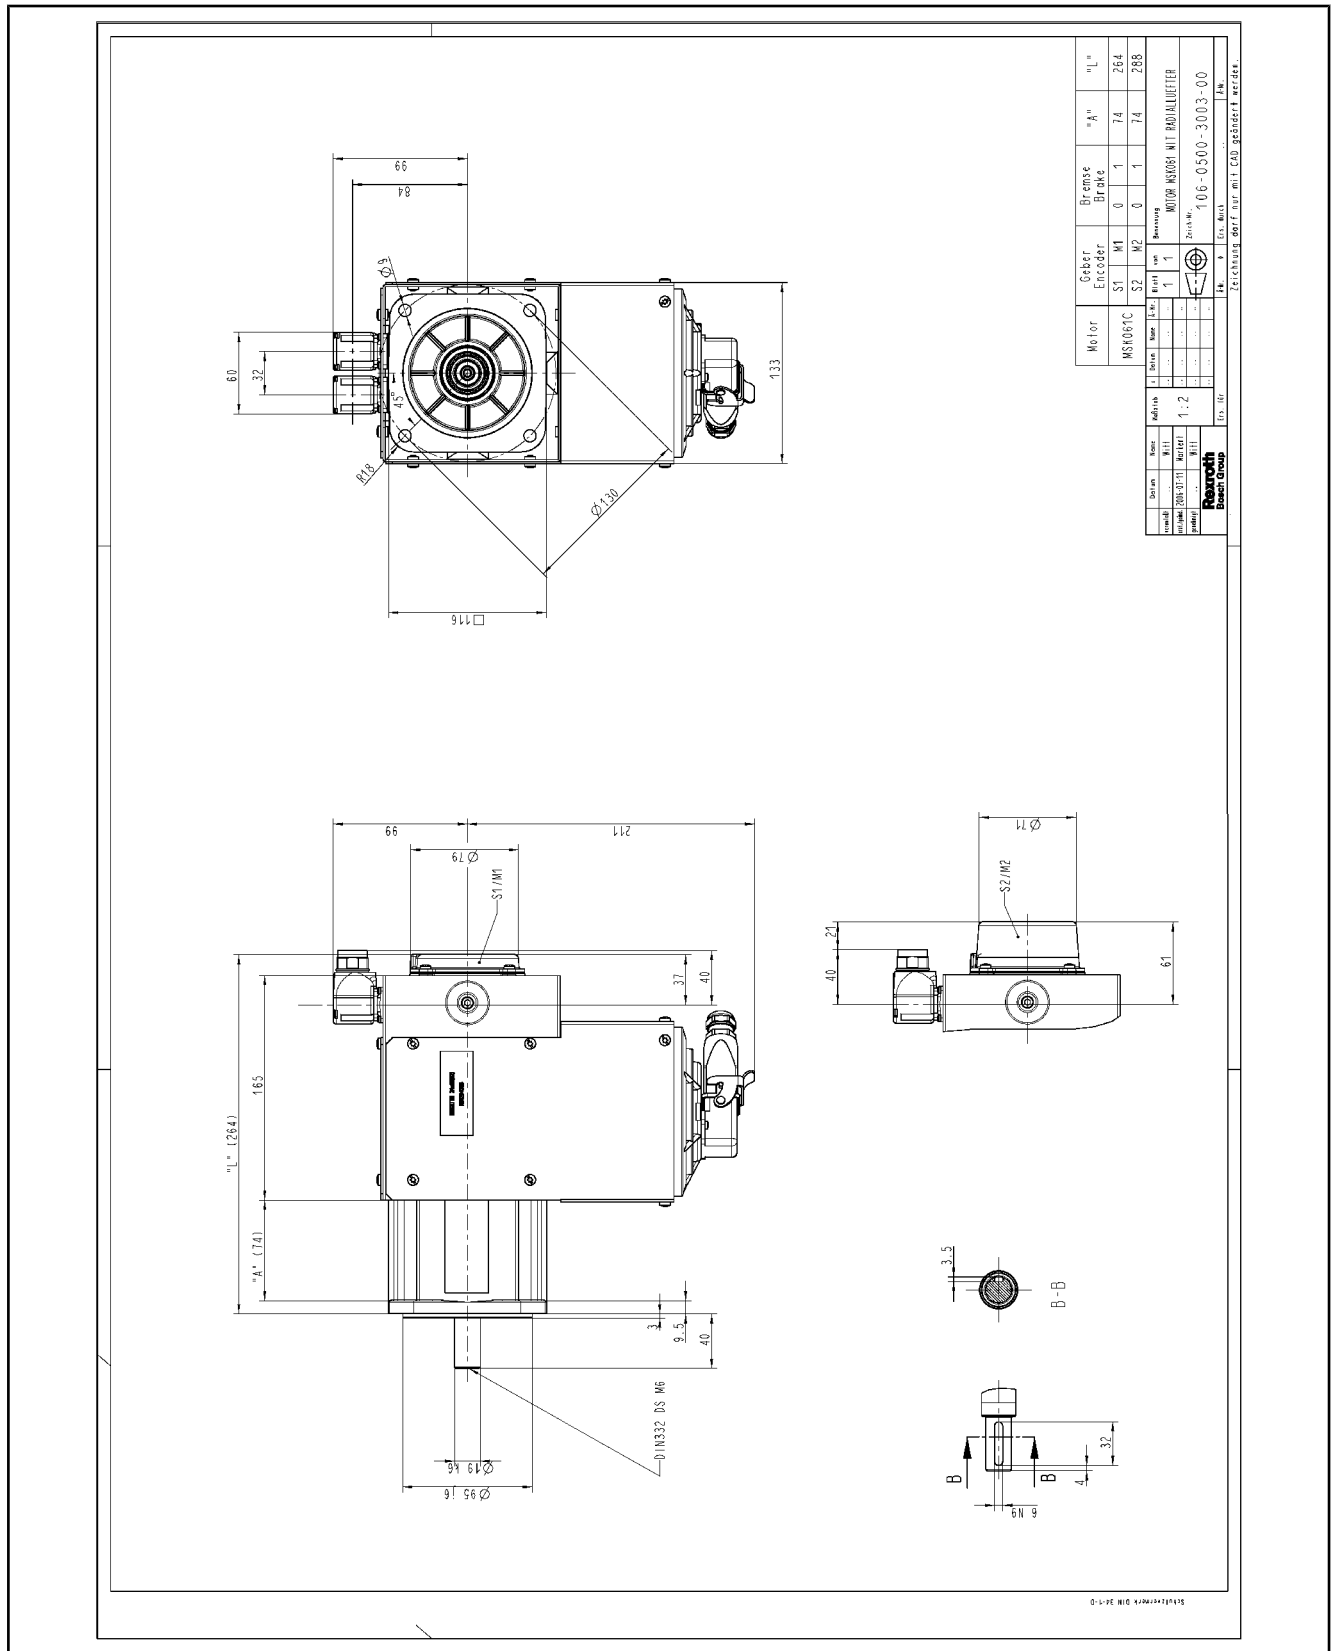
Dimension sheet MSK061 with radial fan unit
